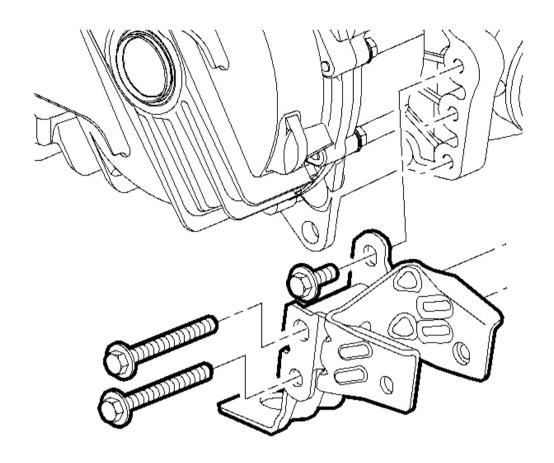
Rear Transmission Bracket, Power Takeoff & Bolts Courtesy of GENERAL MOTORS CORP.
